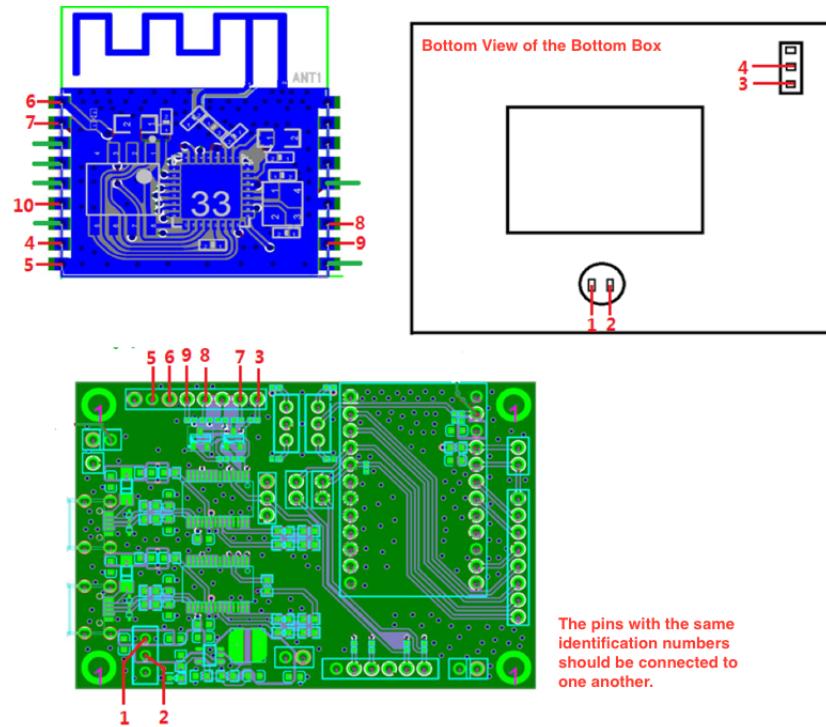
The Wiring of the ESP-WROOM-02 Fixture
